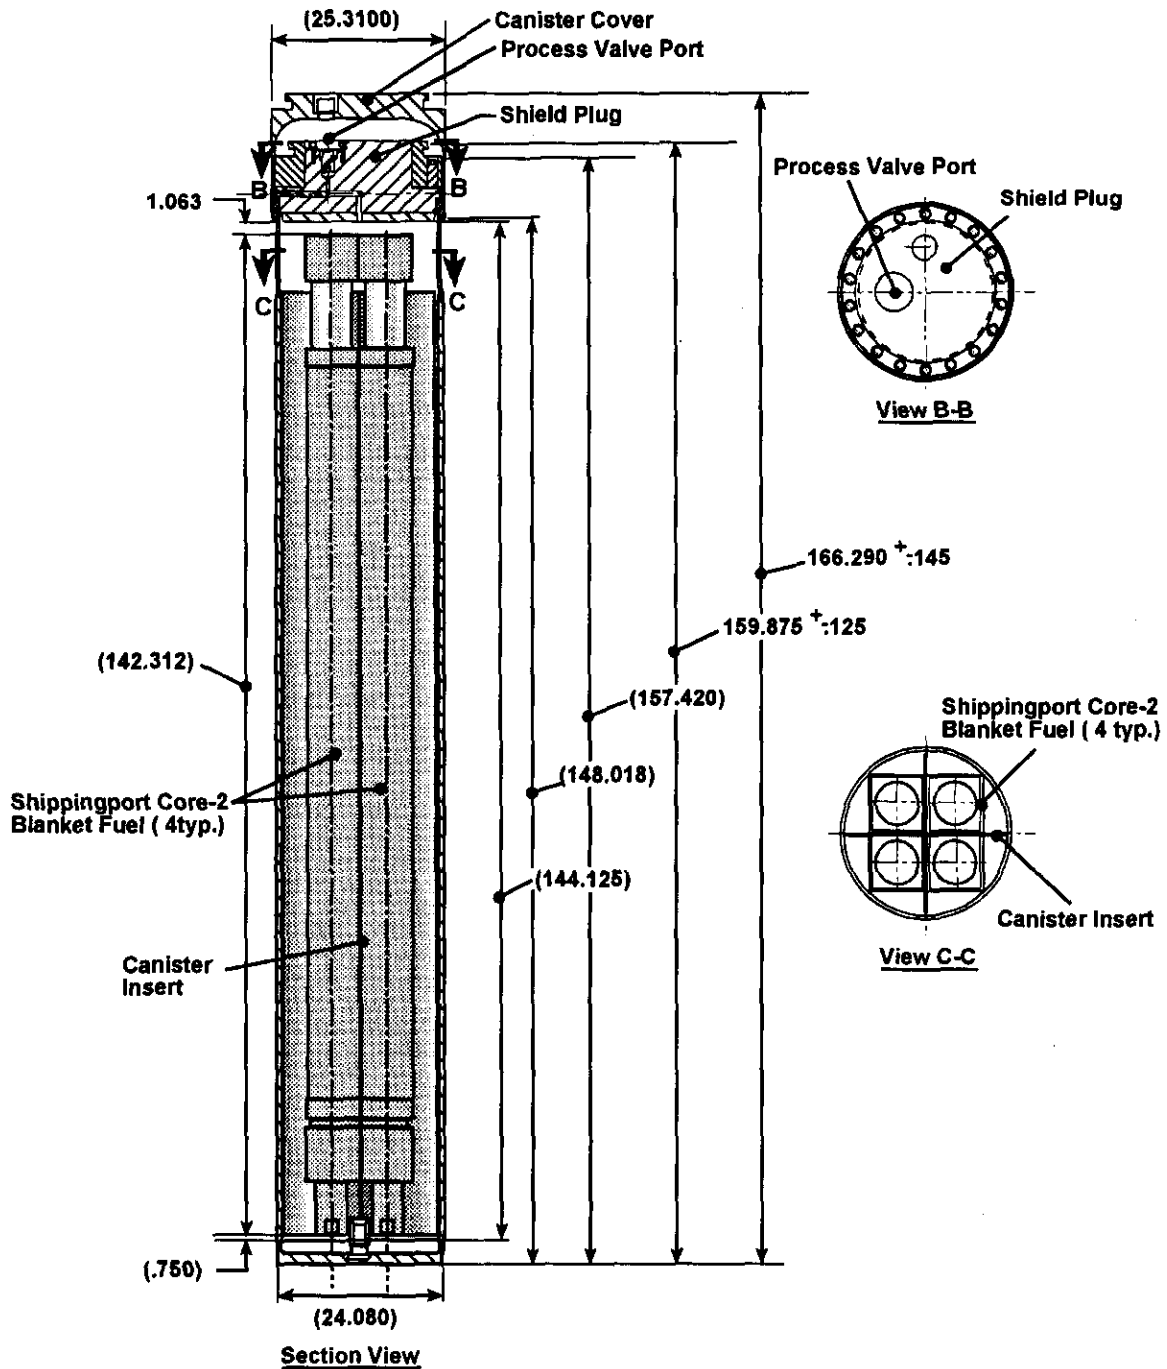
PWR Core 2 Blanket Fuel Assembly.
